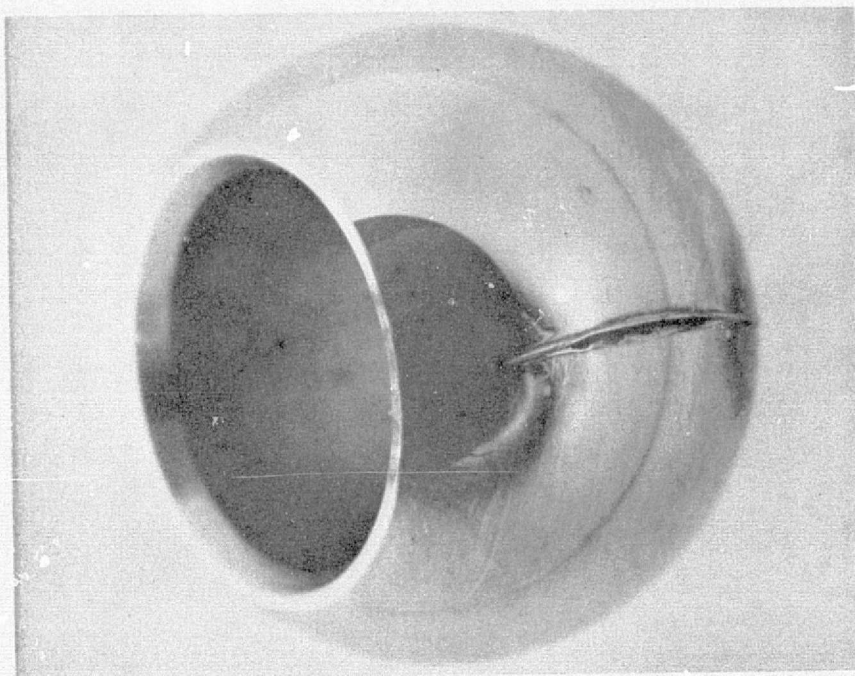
Design A Ball No. 13, Showing Failure Which Overheated at the Crack.
